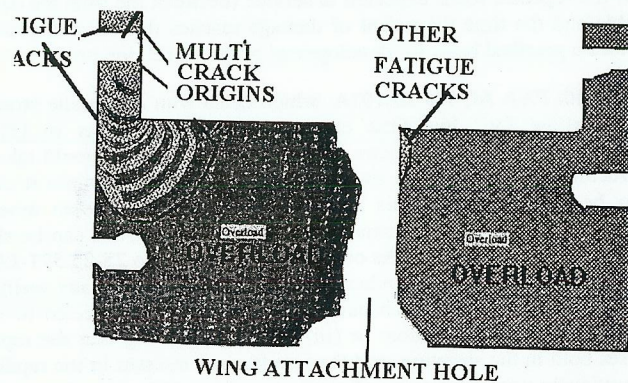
Cross section view of failure surfaces in the Macchi spar.
